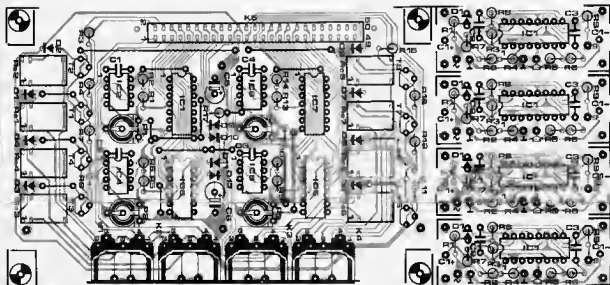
This PCB is used for building the interface and 4 dimmers.
